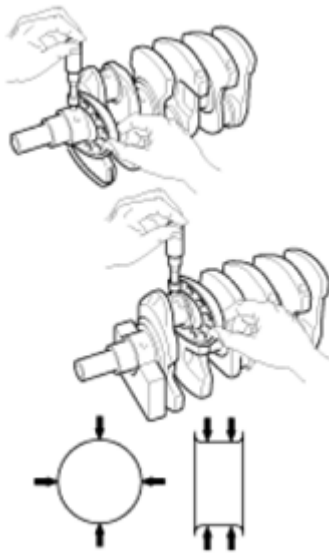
Measuring Diameter Of Main Journal & Crank Pin
